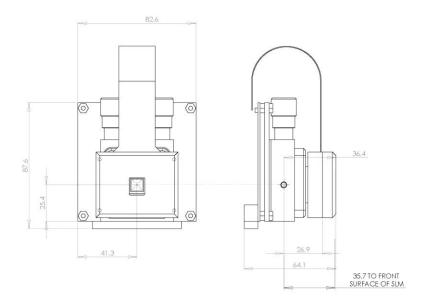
~ Outline drawing showing front and side views of 512 SLM Optical Head.
